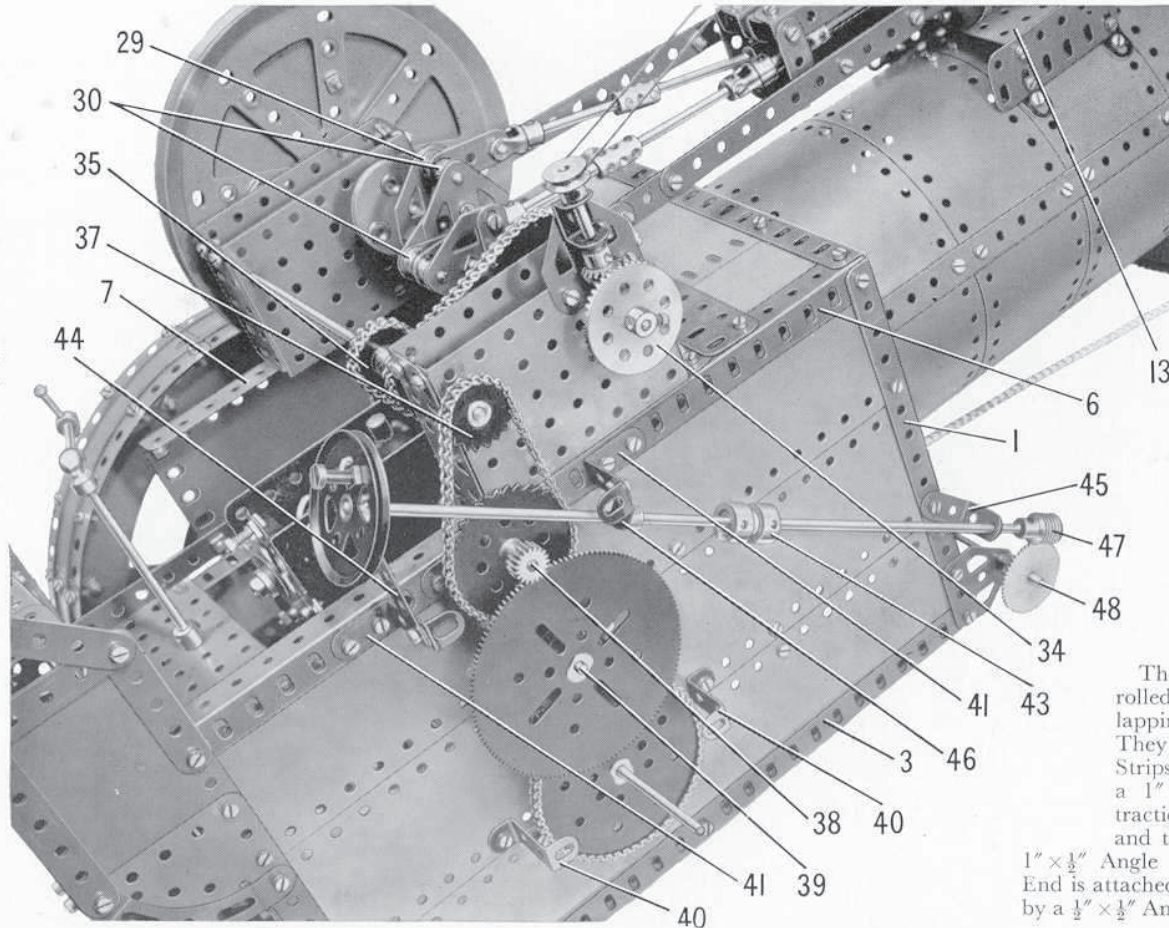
The off-side of the Traction Engine with the rear wheel removed to reveal the drive to the back axle
